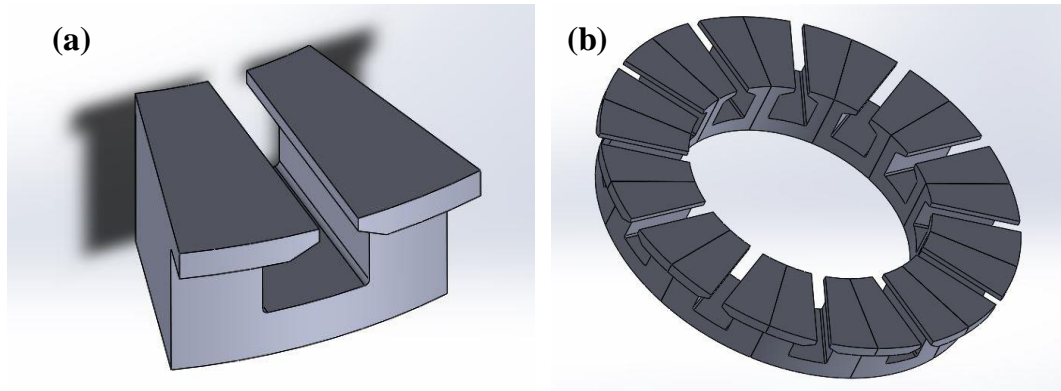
Modular stator: single machined part (a) and final stator design (b)
